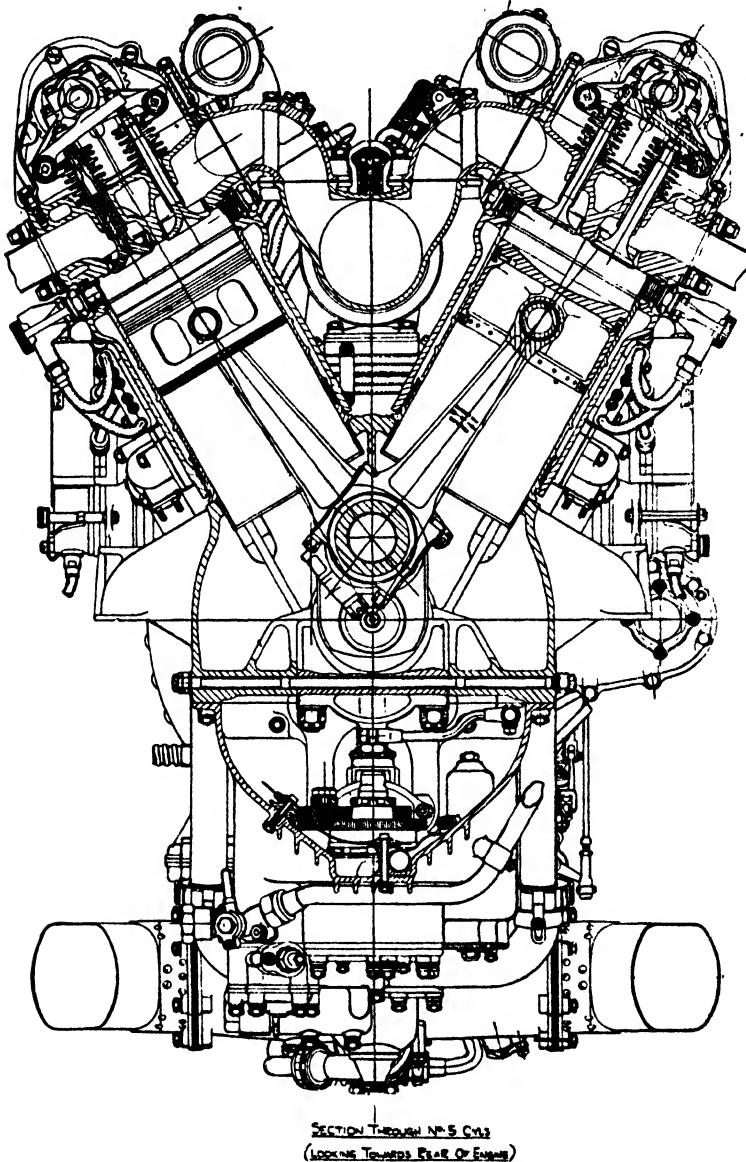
Sectional View of Supercharged Kestrel Engine.
